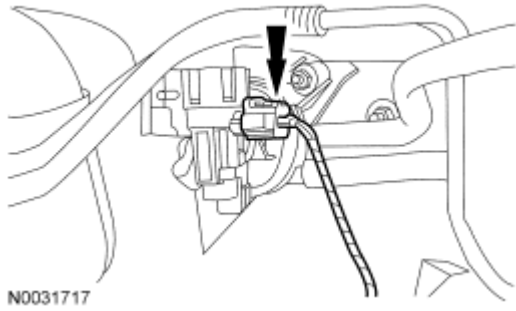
Locating EVAP Canister Purge Valve Electrical Connector
